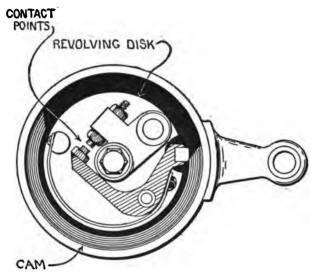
Bosch Circuit Breaker on Single Cylinder Magneto
